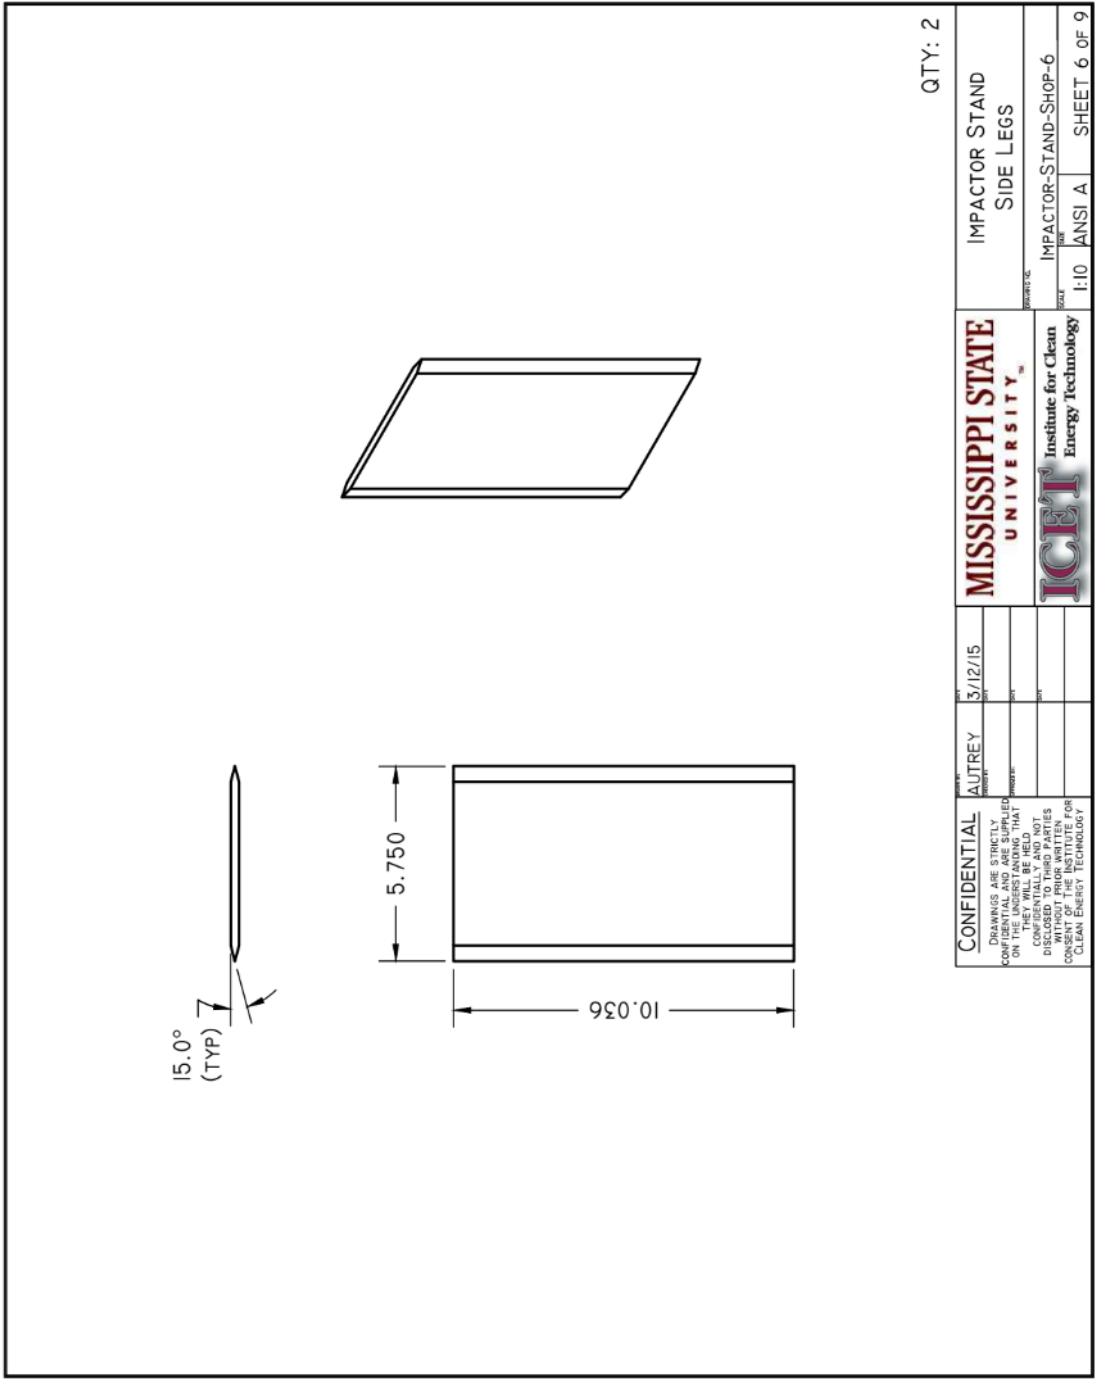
CAD drawing of the horizontal Pilat impactor stand legs.
